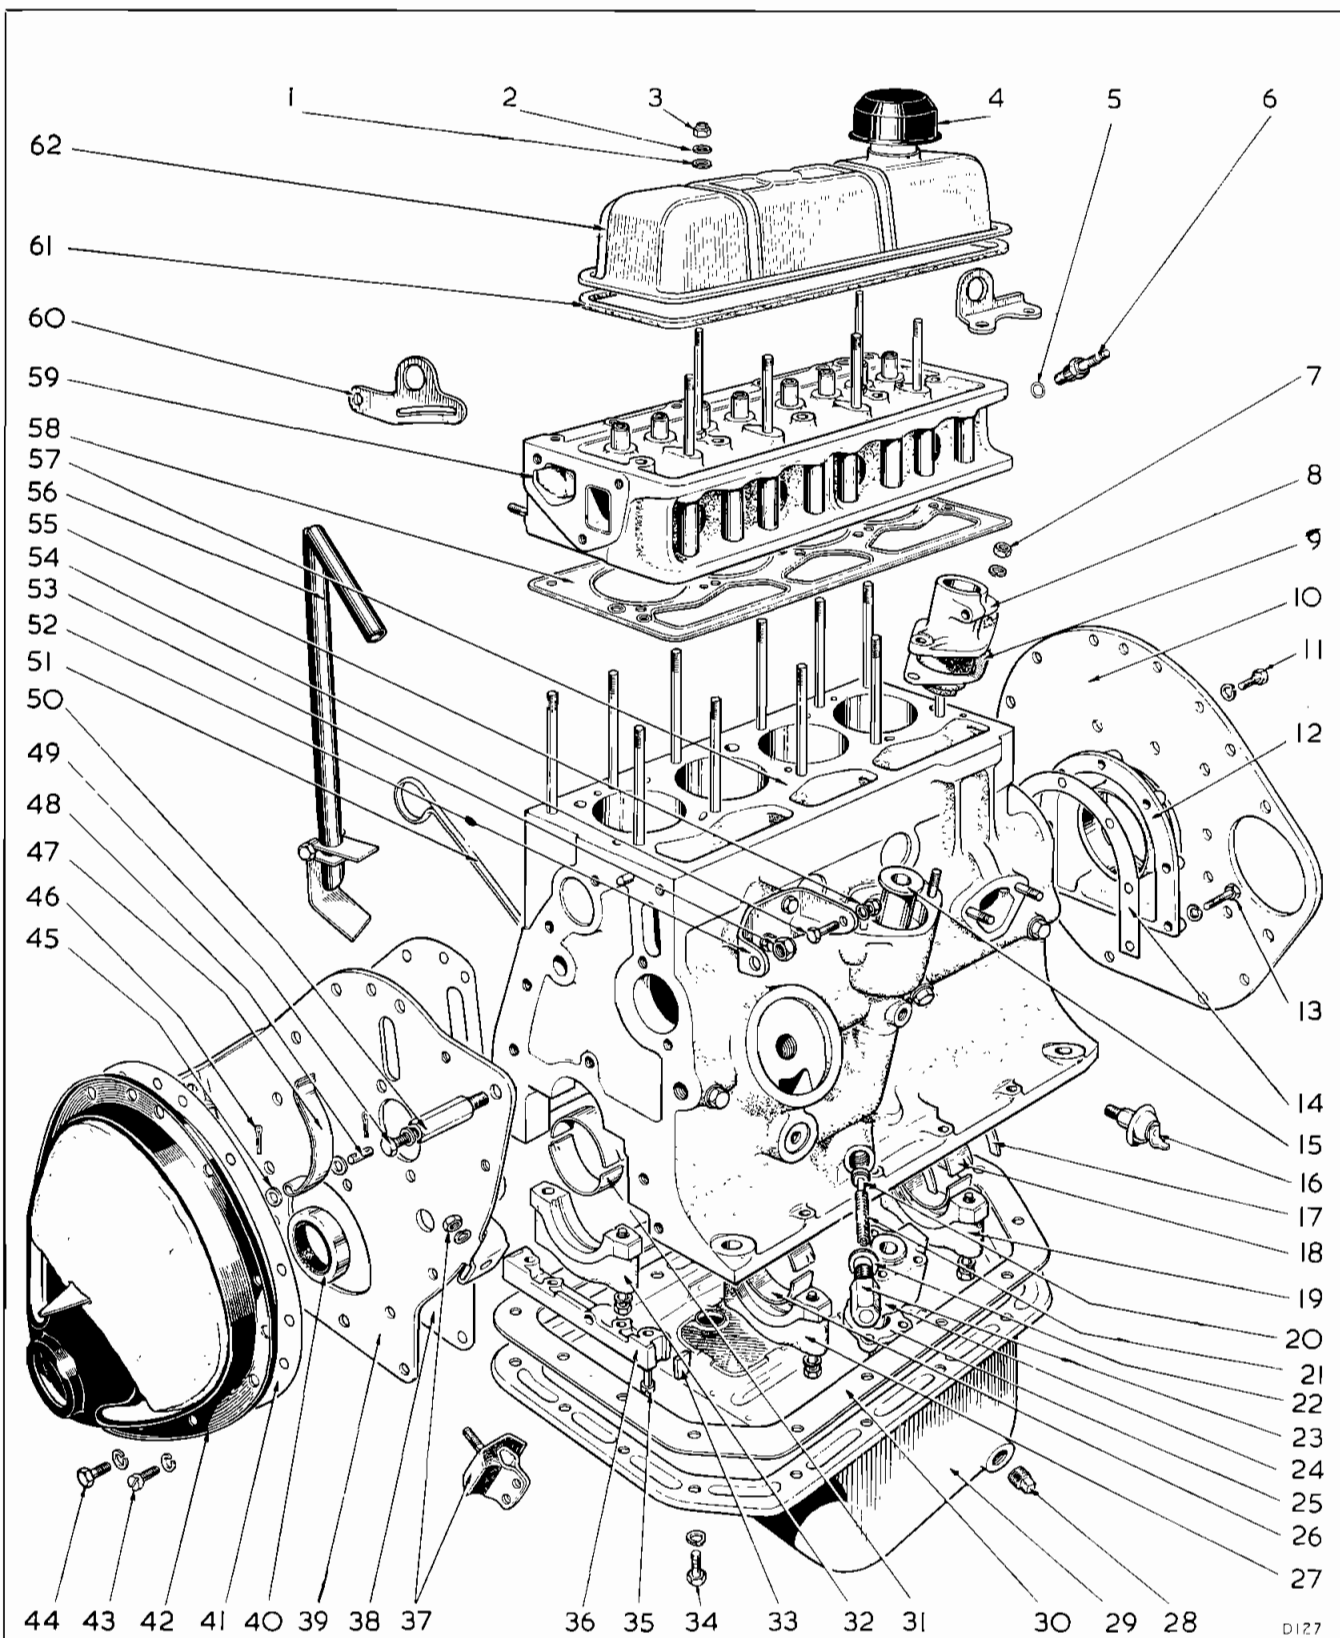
Herald 1200, 12/50 and Spitfire engine details (fixed parts)
